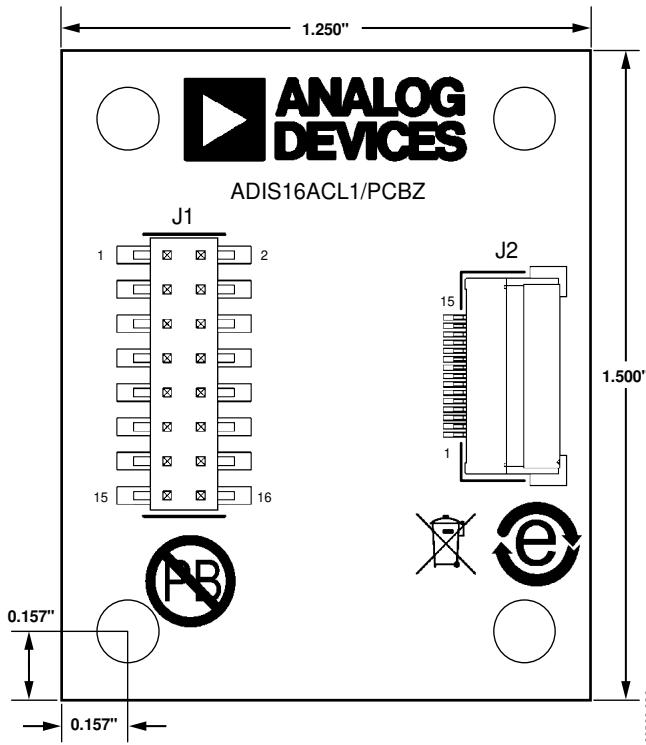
[ADIS16ACL1/PCBZ](#) Top Level View/Dimensions
